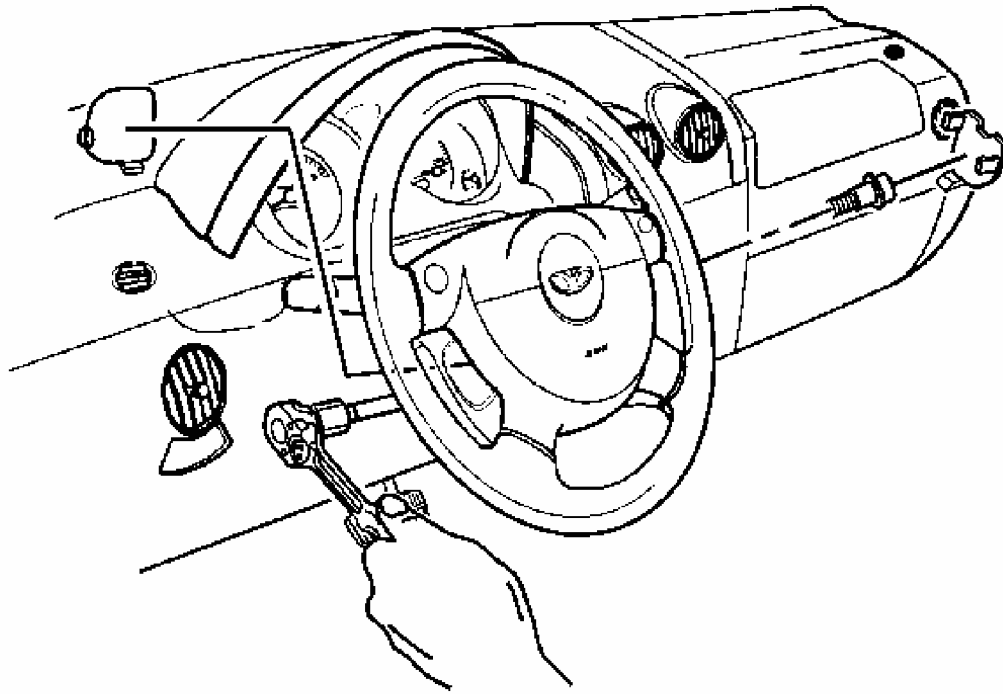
Driver Air Bag Module, Mounting Bolts & Connector
